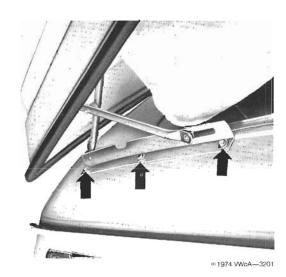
Bolts (arrows) that hold hinge on roof panel.
